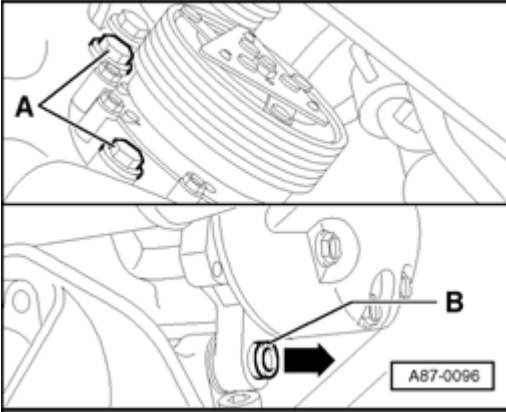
Unbolting A/C Compressor & Pressing Sliding Bushing Back Into Hole
